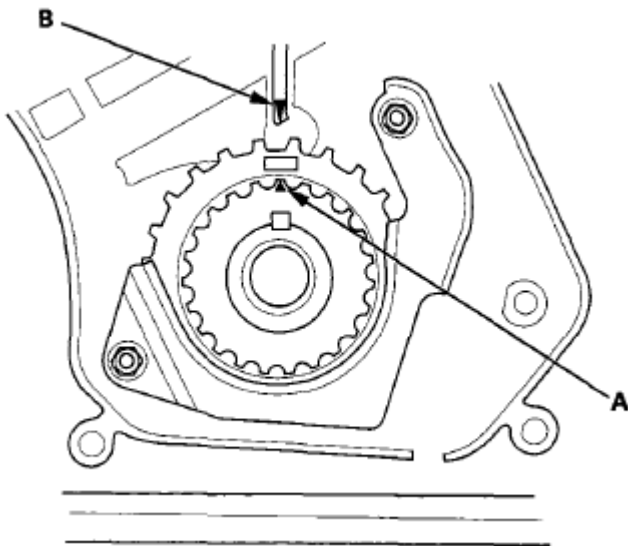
Aligning TDC Mark On Tooth Of Timing Belt Drive Pulley With Pointer On Oil Pump
